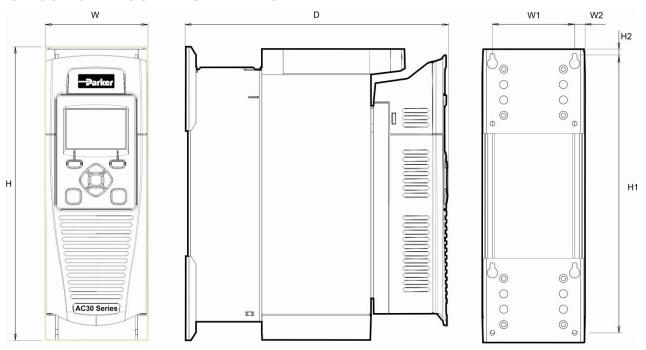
Mechanical Dimensions for AC30V Drive - Frame D Illustrated
